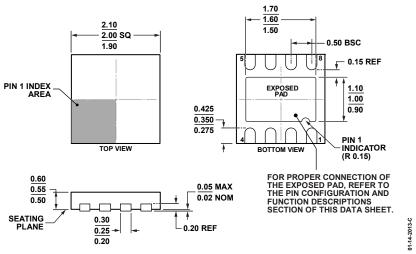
8-Lead Lead Frame Chip Scale Package [LFCSP] 2.00 mm × 2.00 mm Body, and 0.55 mm Package Height (CP-8-10) Dimensions shown in millimeters
